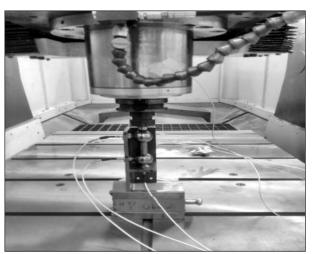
Thermal distortion set-up for measurement setup on milling machine.
